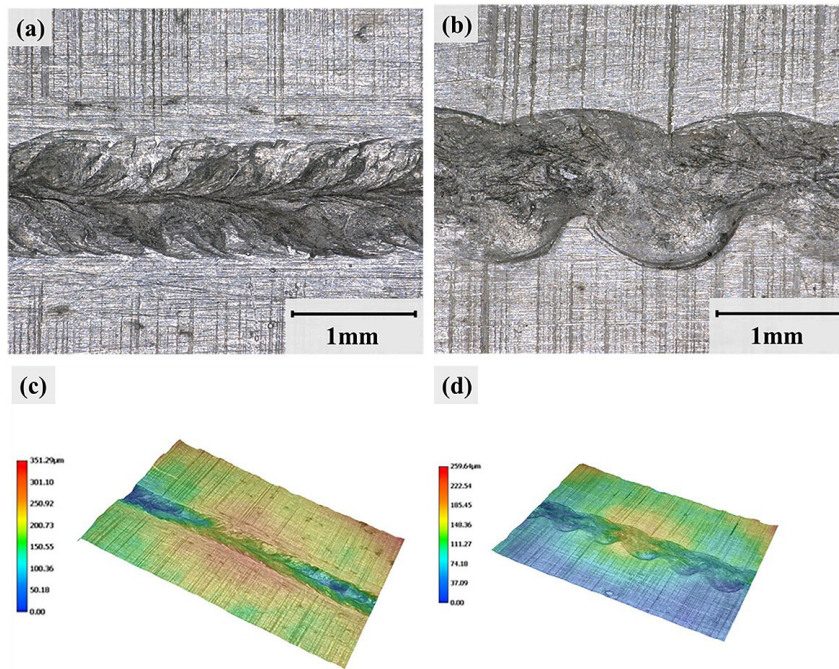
Macroscopic Morphologies and Cross Sections of Two Different Welds, (a) Non-oscillating Welding, (b) Oscillating Welding, (c) 3D view of Non-Oscillating joint, (d) 3D view of oscillating Welding.
